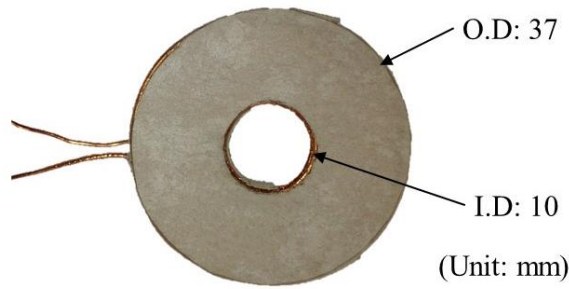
shows the fabrication procedure for the coil winding. The corkscrew design of the tubular LSRA has a simple disk-shaped hand wound using enamelled copper wire 0.55 mm in diameter. This disk-shaped coil enables the coil winding to be assembled on both sides of the stator slot. There are 24 coils in total, and each coil has 60 turns. The coil winding was wound (60 turns per coil) on a mould with thermal sheet insulation paper to achieve the disk-shaped coil. The copper coil winding was sandwiched between the thermal sheet insulation paper (Nomex paper type 410) with 0.1 mm thickness. Then, a thin acrylic resin layer was injected into the coil to maintain its shape once it was removed from the mould. Lastly, the mould was disassembled after the acrylic resin had cured, and the coil winding with two connecting wires protruding was manufactured. The manufactured coil winding's outer diameter (O.D) and inner diameter (I.D) is 37 mm and 10 mm, with a maximum coil winding thickness of 2.4 mm.
